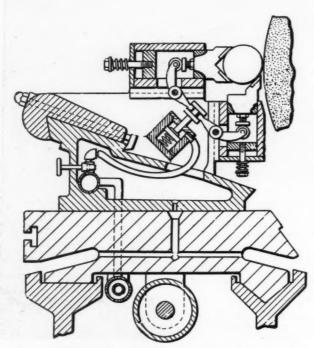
Automatic steady rest assures that workpiece is always centered throughout length
